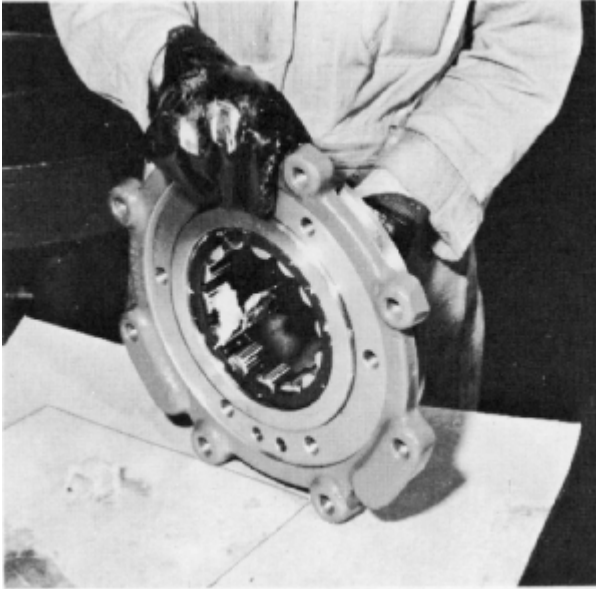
Coating I.D. Of Roller And Cage Assembly
